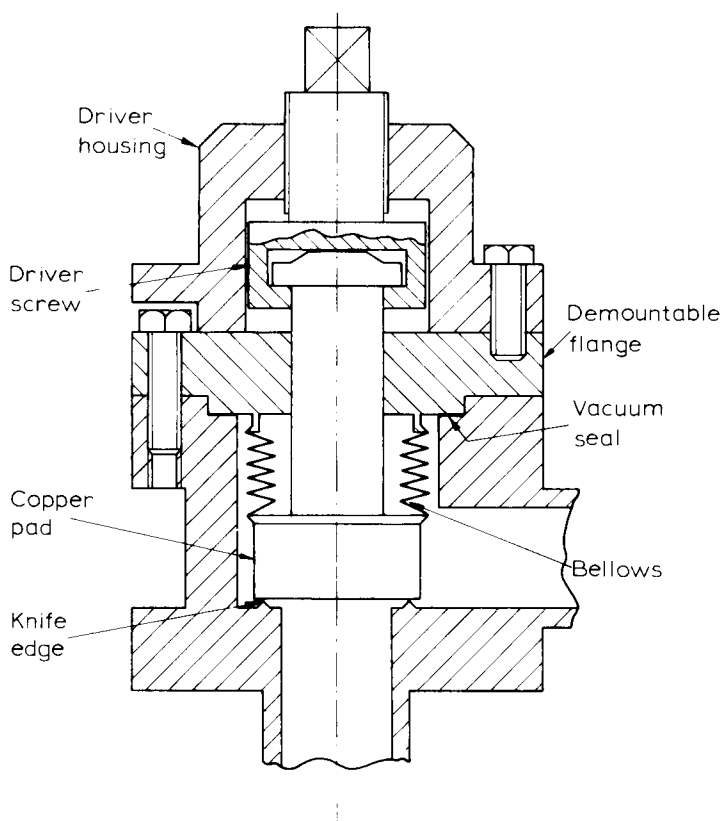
Schematic diagram of a knife edge sealed right-angle valve
